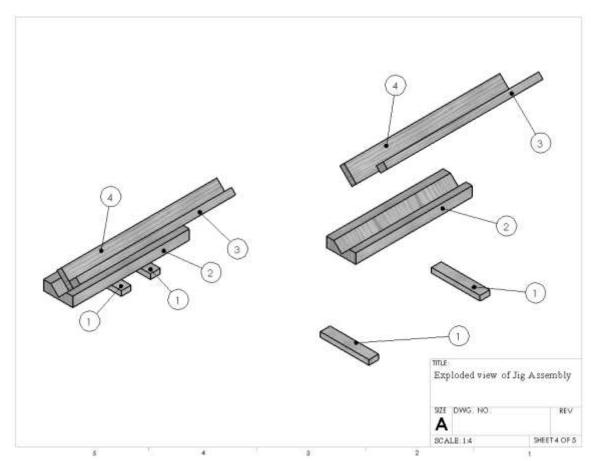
Construction Jig (Left) and Exploded View (Right) of Jig.
